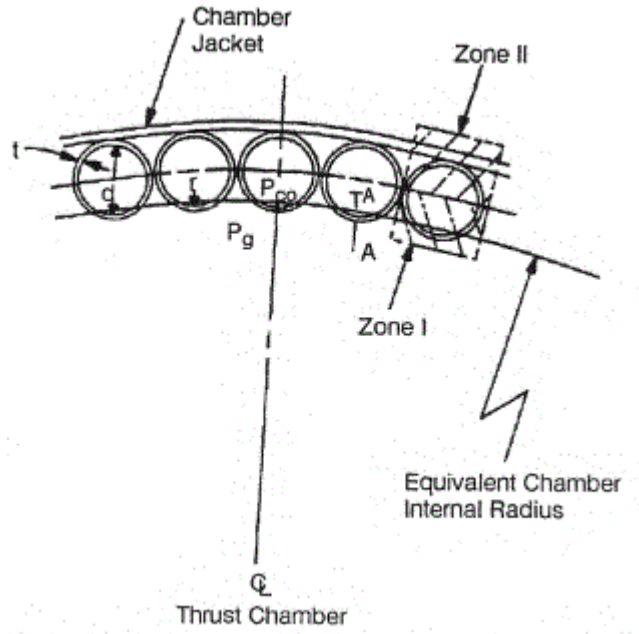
Configuration of Circular Tubes used in a Regen Engine [9]
